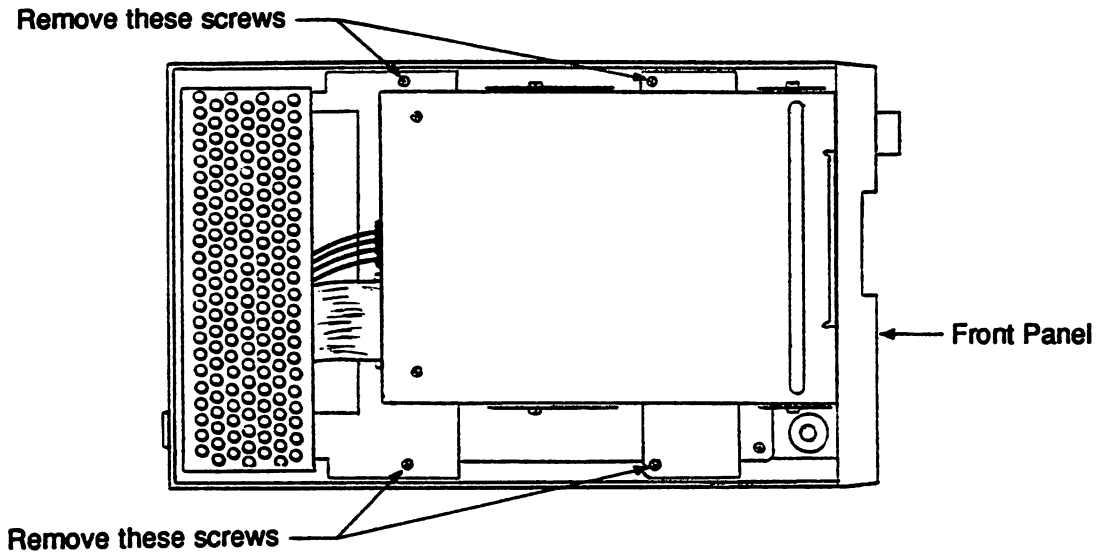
1581 DRIVE MECHANISM SCREW REMOVAL
